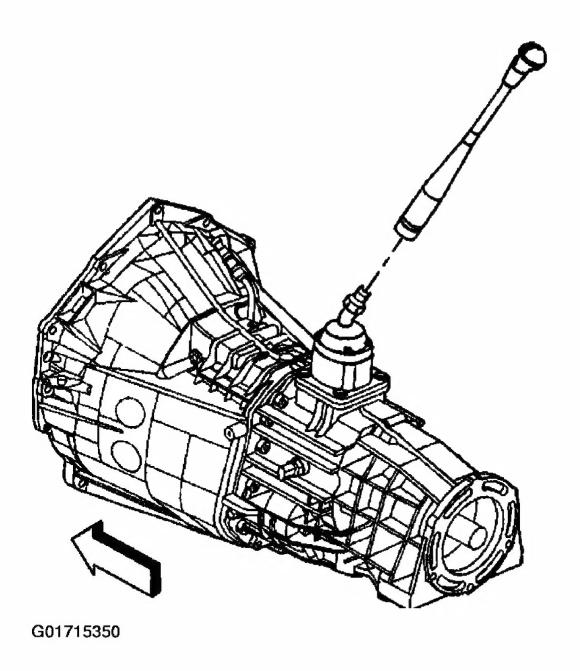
New Venture Gear NV 3500 Transmission Assembly
